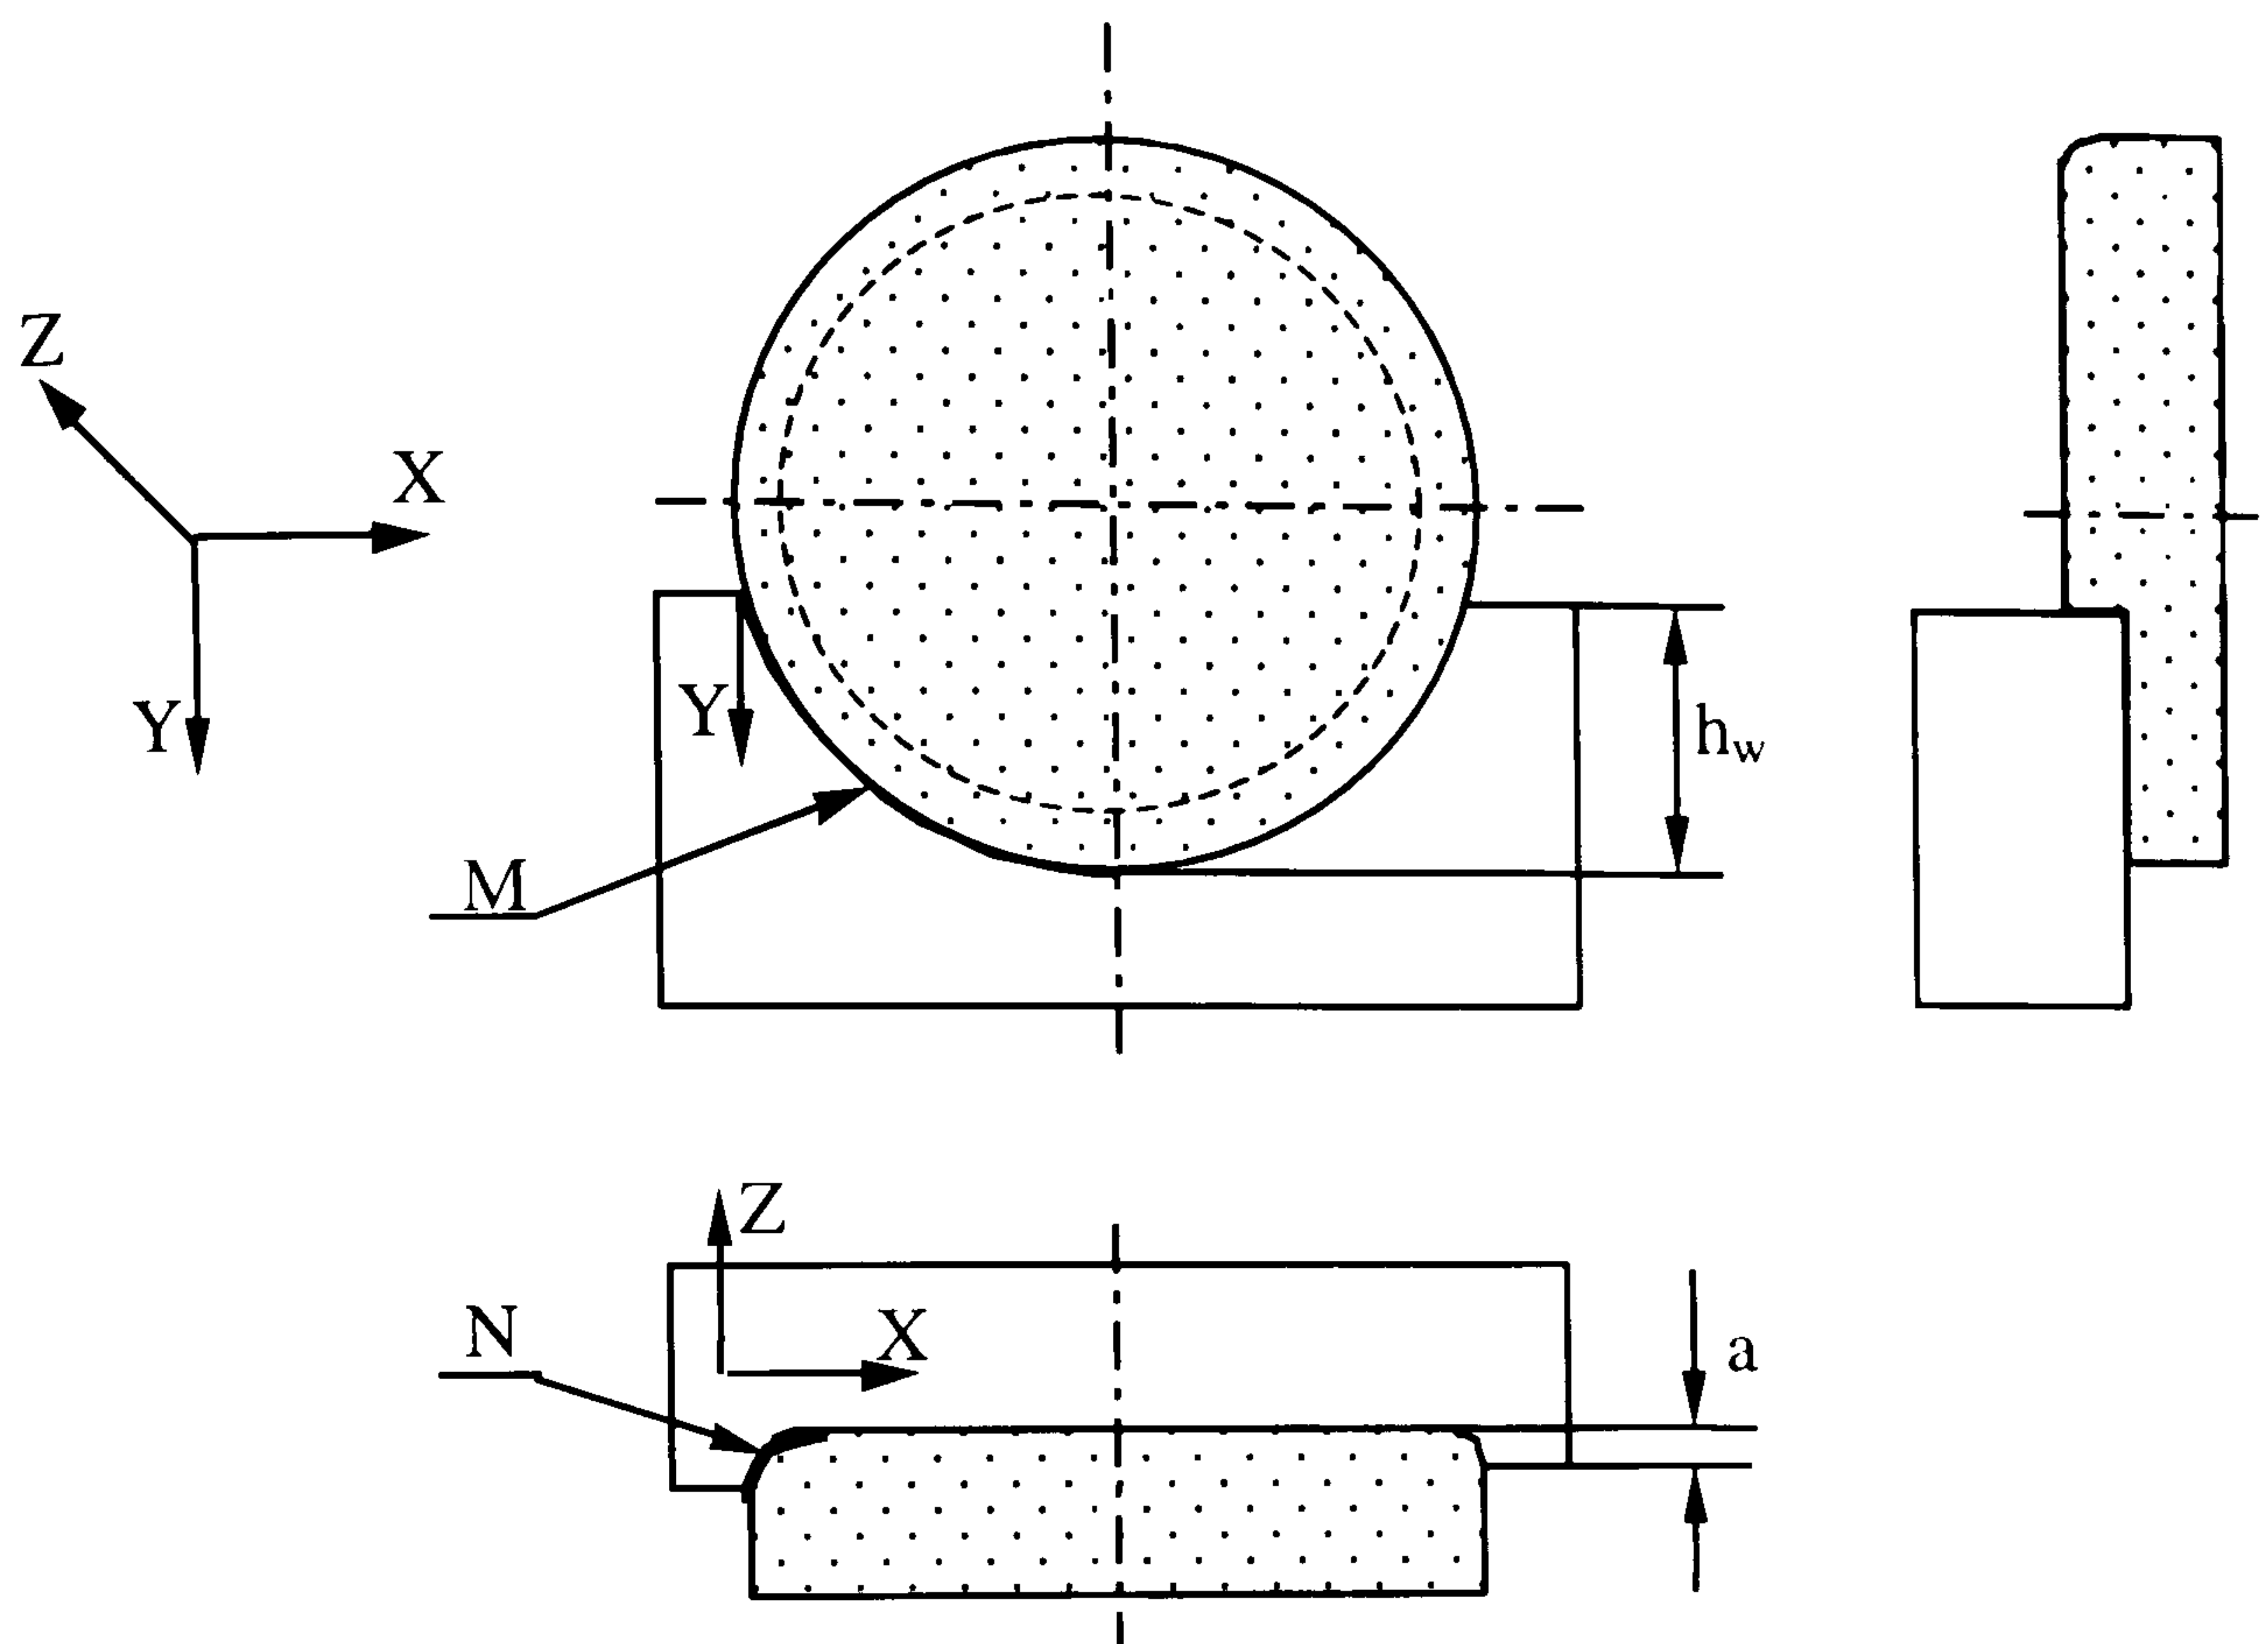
The geometric relationship between the grinding wheel and the workpiece in face grinding on a horizontal surface grinding machine
